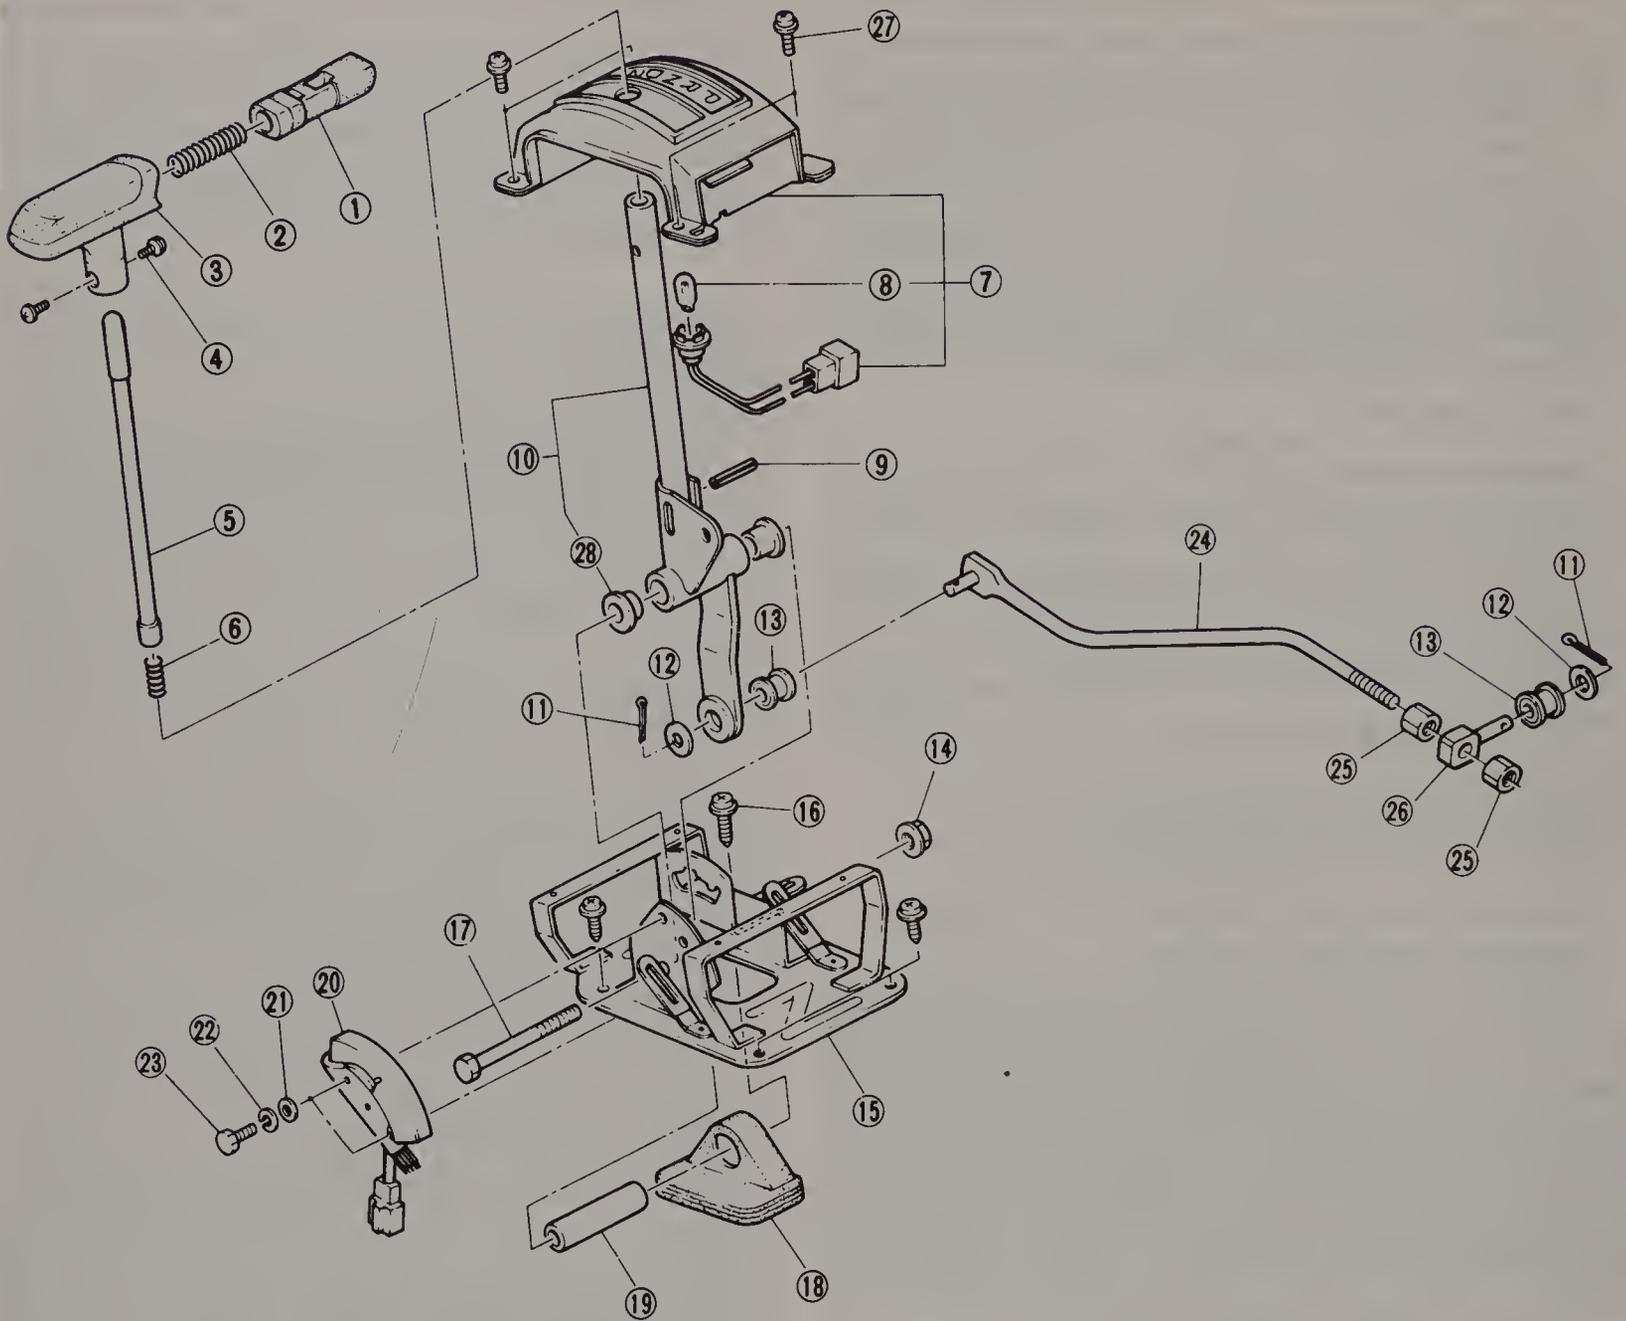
Automatic transmission shifter components – exploded view (Sec 13)
